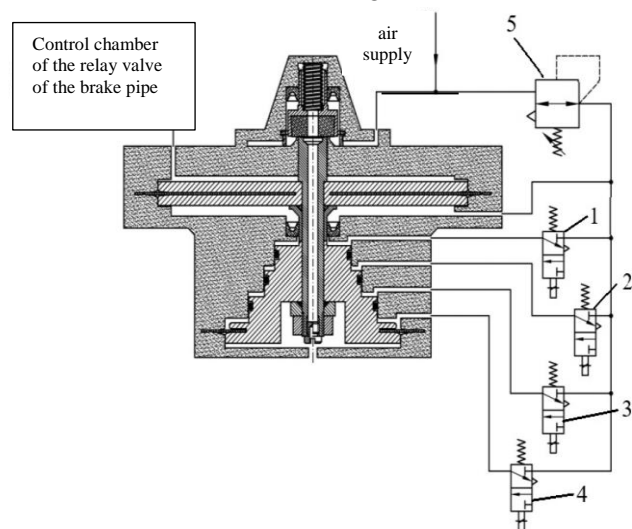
Electro-pneumatic brake pipe pressure control system: 1, 2, 3, 4 – electro-pneumatic valves, 5 – reducing valve [6]
